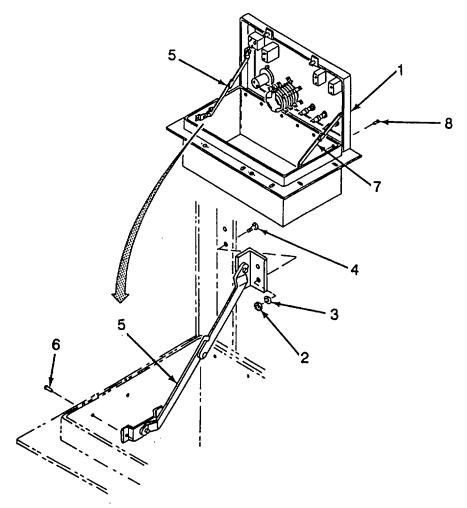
Control Box Disassembly (Sheet 1 of 2)
